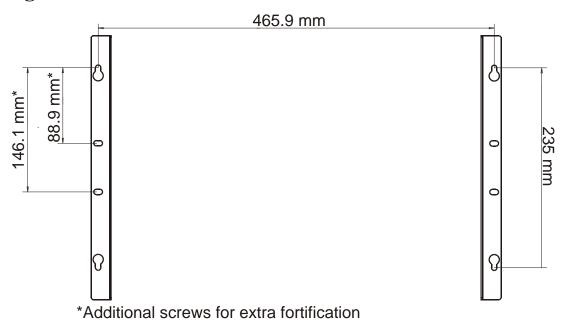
8 I/O Frame (19") Metal Back Installation Dimensions
